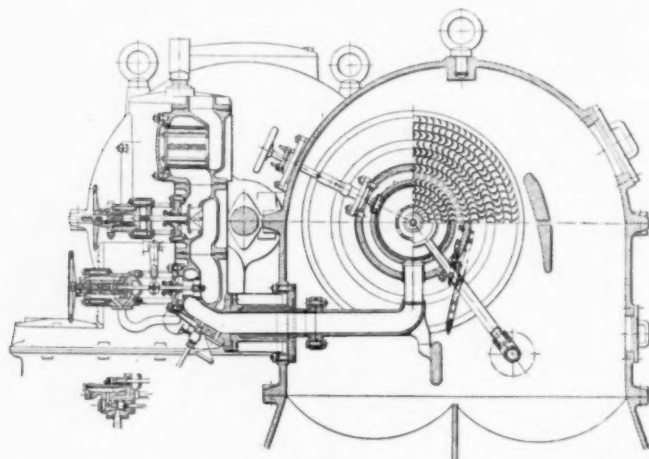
GENERAL ARRANGEMENT OF THE LJUNGSTRÖM EPICYCLIC REVERSING GEAR FOR MARINE TURBINES
